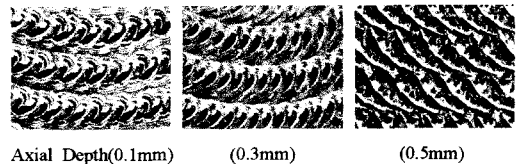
Shapes of machined surfaces according to the variations of axial depth
